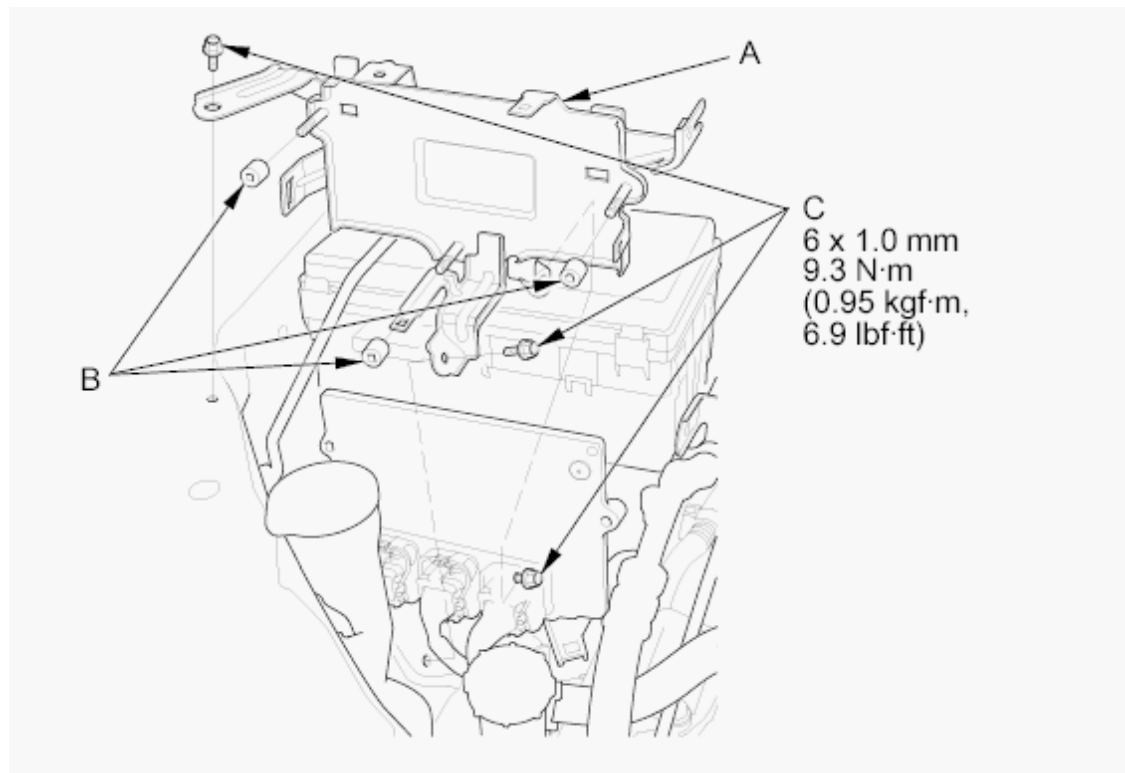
Identifying PCM Bracket Bolts With Torque Specifications (Continental PCM)
